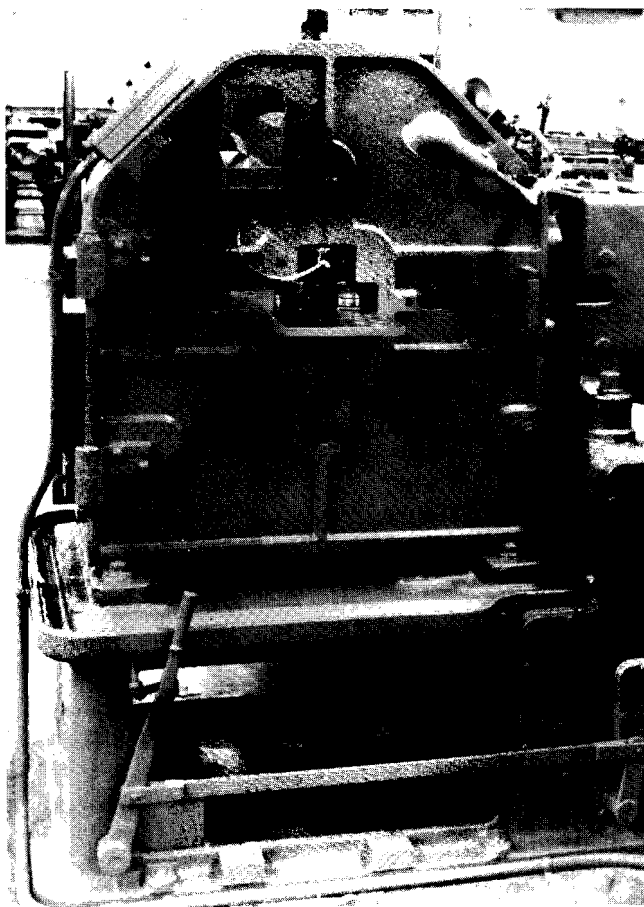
POWERED TURK'S-HEAD MACHINE USED FOR SHAPE FABRICATION
